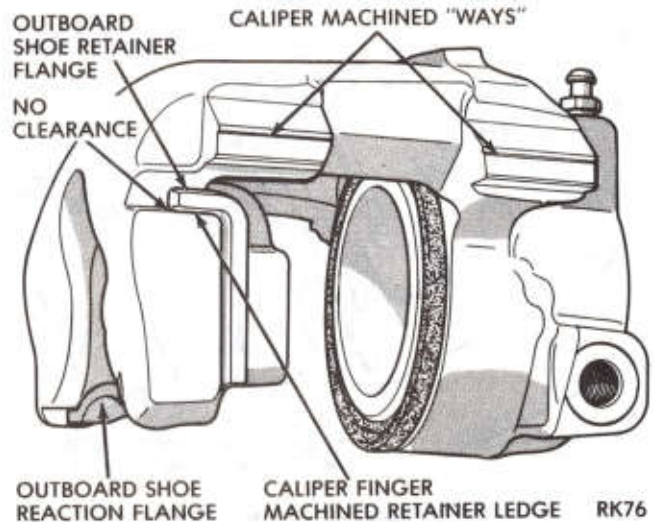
Caliper Finger and Outboard Shoe Retainer Flange
